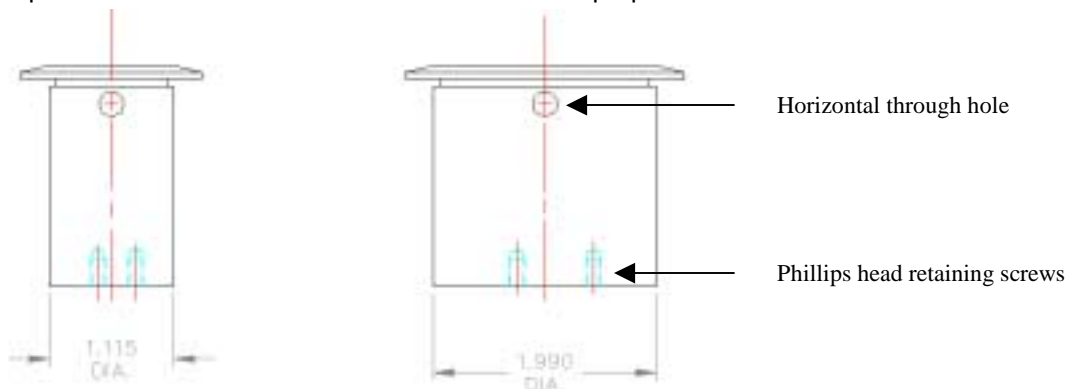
Drawing of large socket holder (Part # 21213) and small socket holder (Part # 21212).
